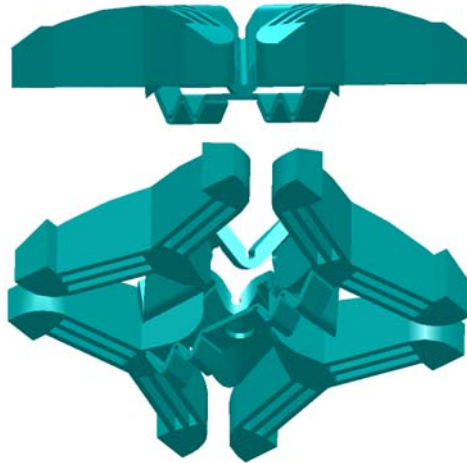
CAD model of a rod holder that utilized a series of compliant joints
